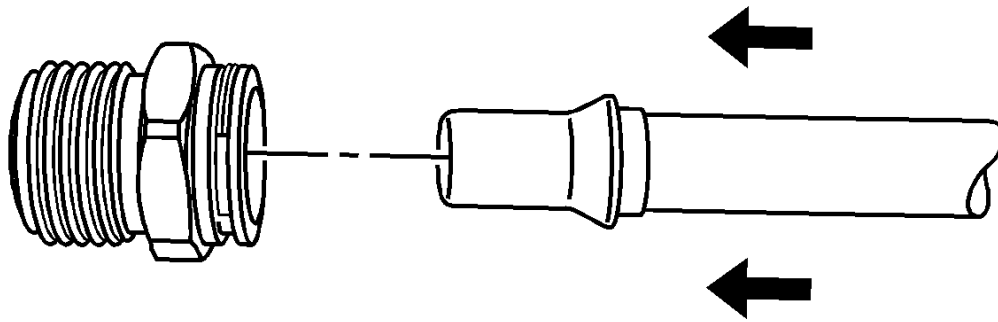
View Of Generator Cooling Inlet Pipe & Generator Cooling Inlet Pipe Fitting
